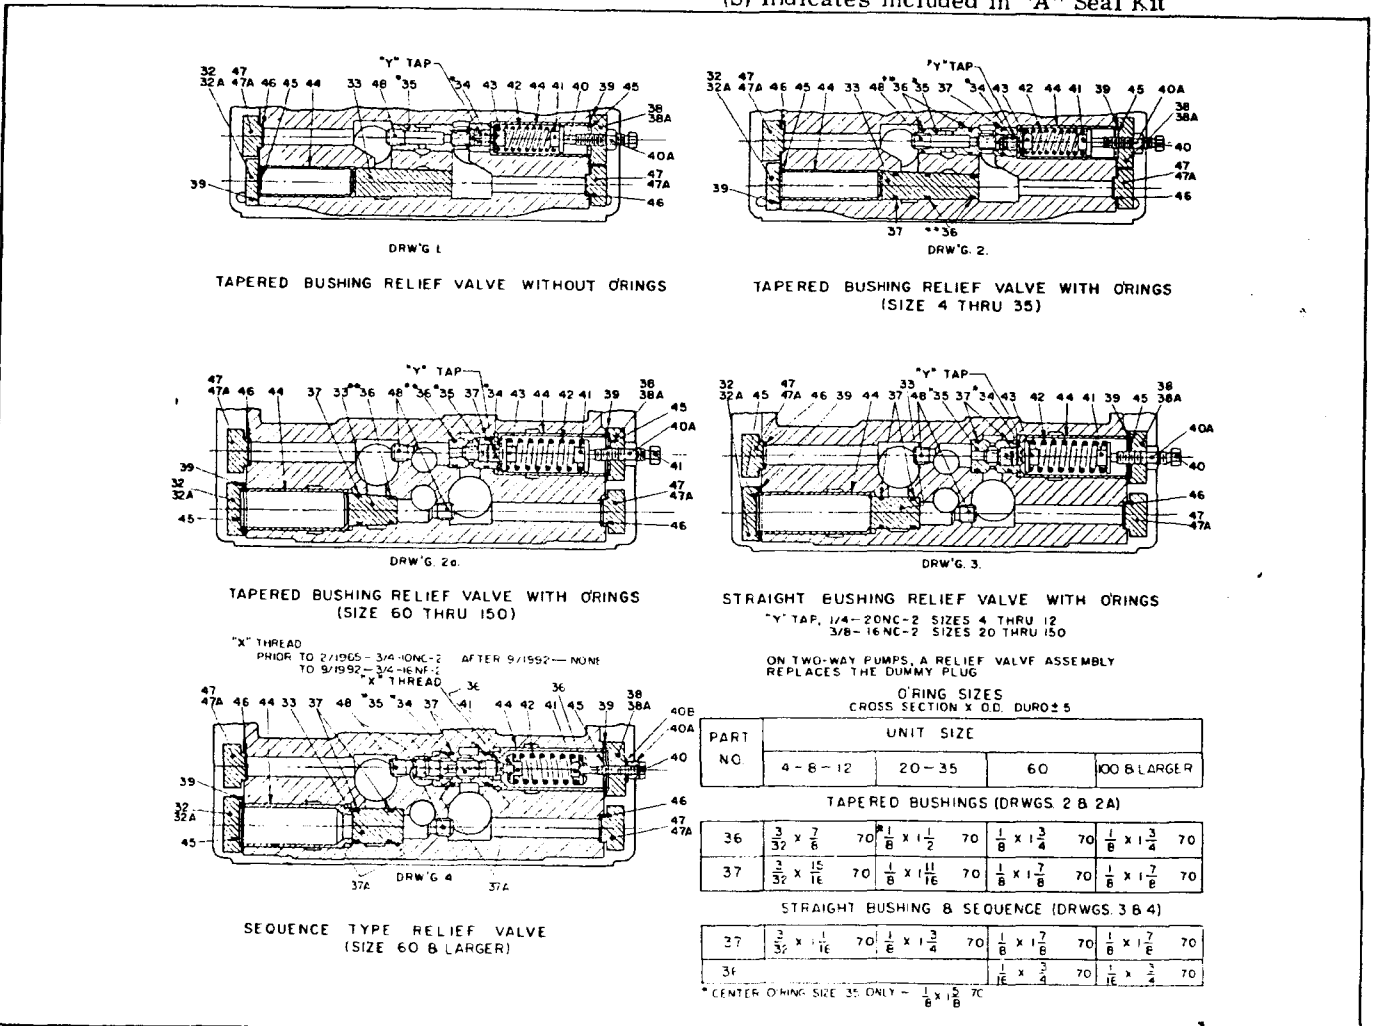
Parts Drawing. Typical High Pressure Relief Valves for Type "D" Units. DS-947911E (504034E). Bulletin 947006F Page 12
